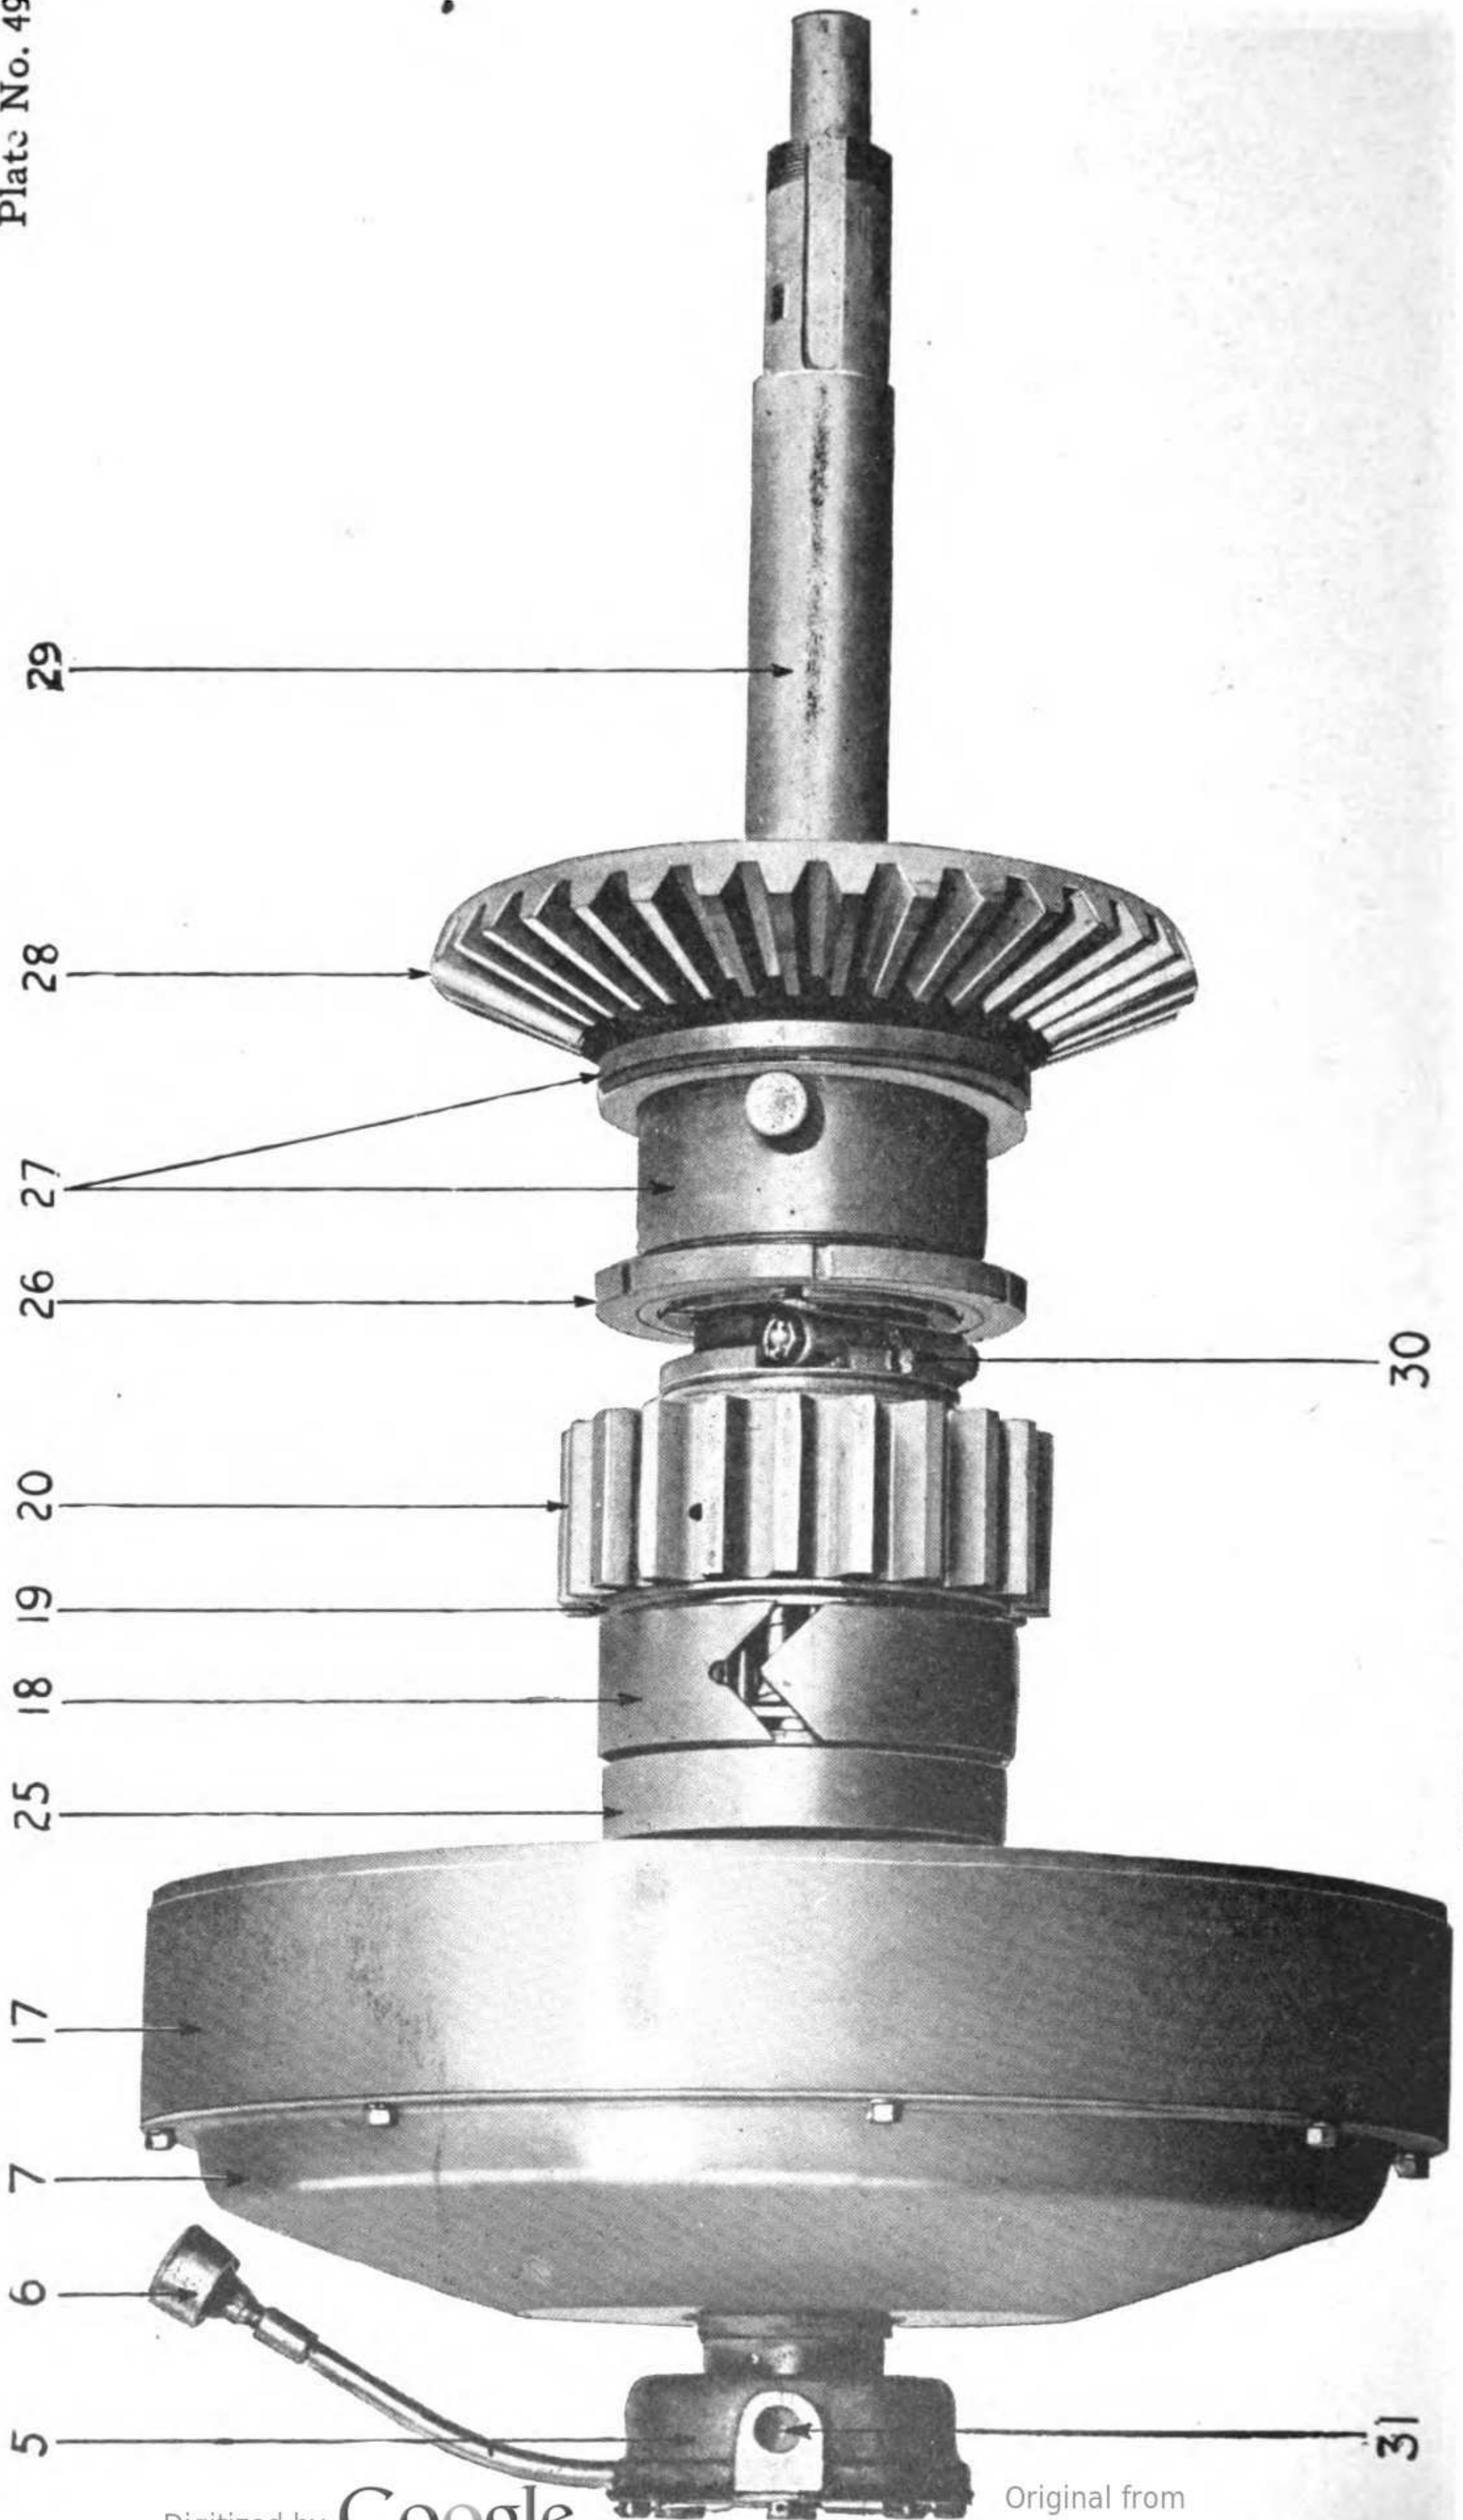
shows the steering clutch and shaft assembled with the bevel gear and the spur pinion which transmits the drive to the intermediate gear inside the transmission housing. Construction of the steering clutch will be seen by referring to Plate 48, which shows it disassembled.
